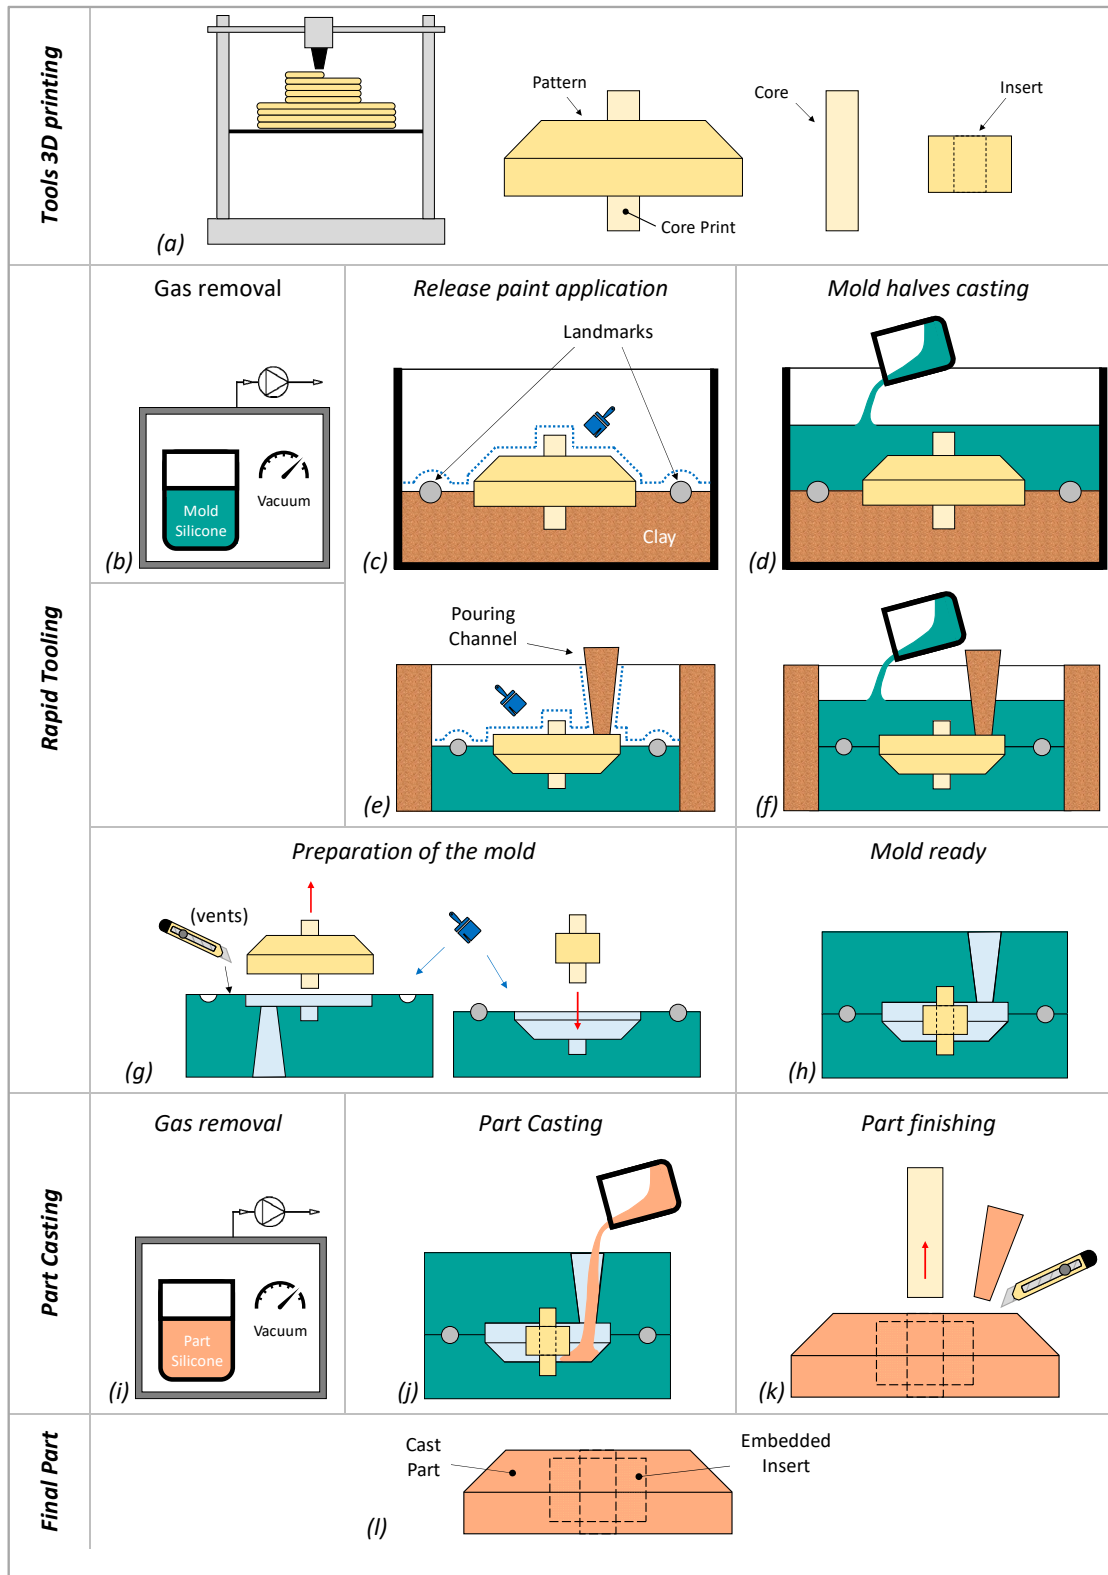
The procedure of the rapid casting of silicone parts. (a) Tools 3D printing, (b–h) rapid tooling steps, (i,j,k) part casting steps and (l) final cast part with insert and passing through cavity.
